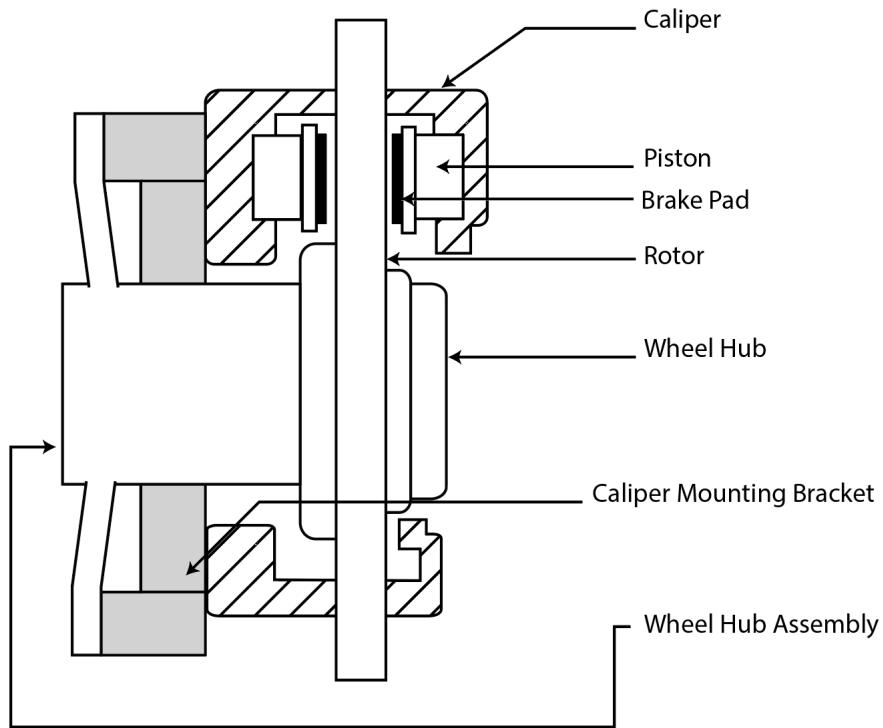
Side view of a brake rotor and a fixed caliper [13]
